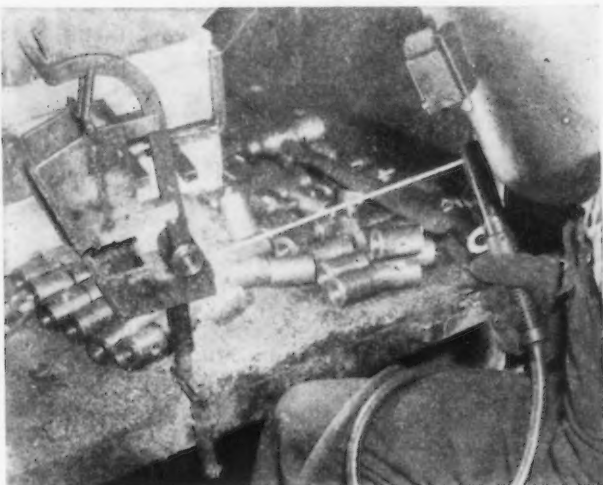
Welding .25 carbon hub to .20 carbon steel strap to fabricate tractor brake pedal.
